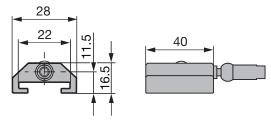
Installation dimensions of BTL5-T-2814-1S magnet
